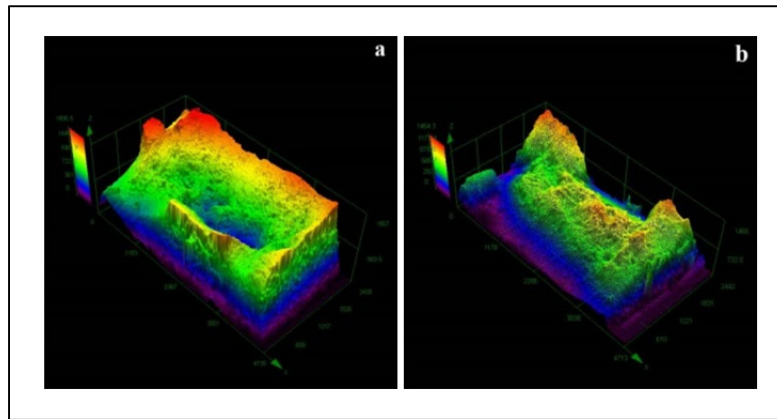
Images observed using a confocal LSM that reveal (a) the cup and (b) the cone ductile fractures surfaces of the as-welded UNS S41500 that failed in the BM
